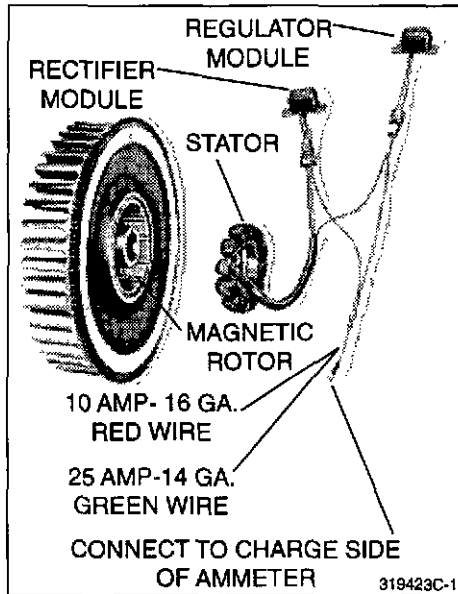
Flywheel Alternator (10 and 25 amp systems)
